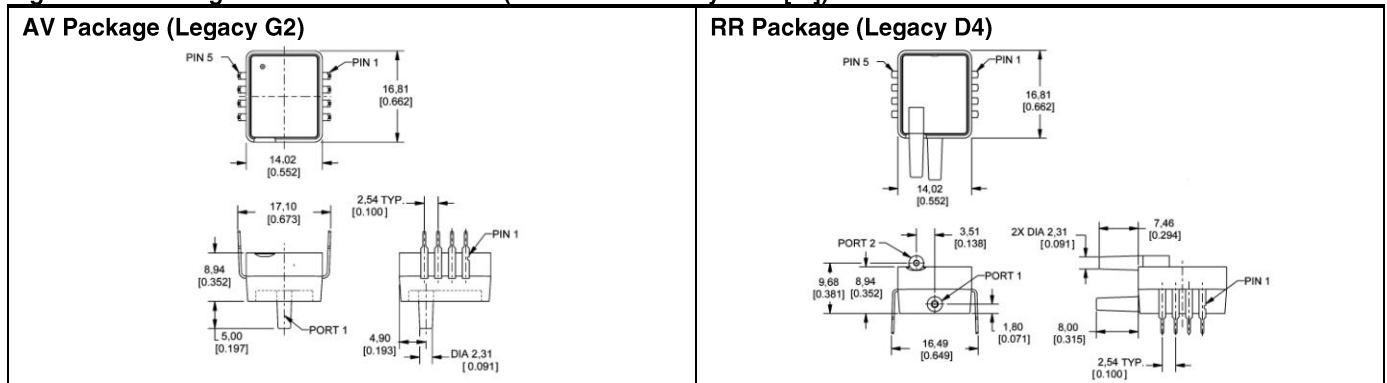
Mounting Dimensions and Pinout (For reference only. mm/[in]) Continued
